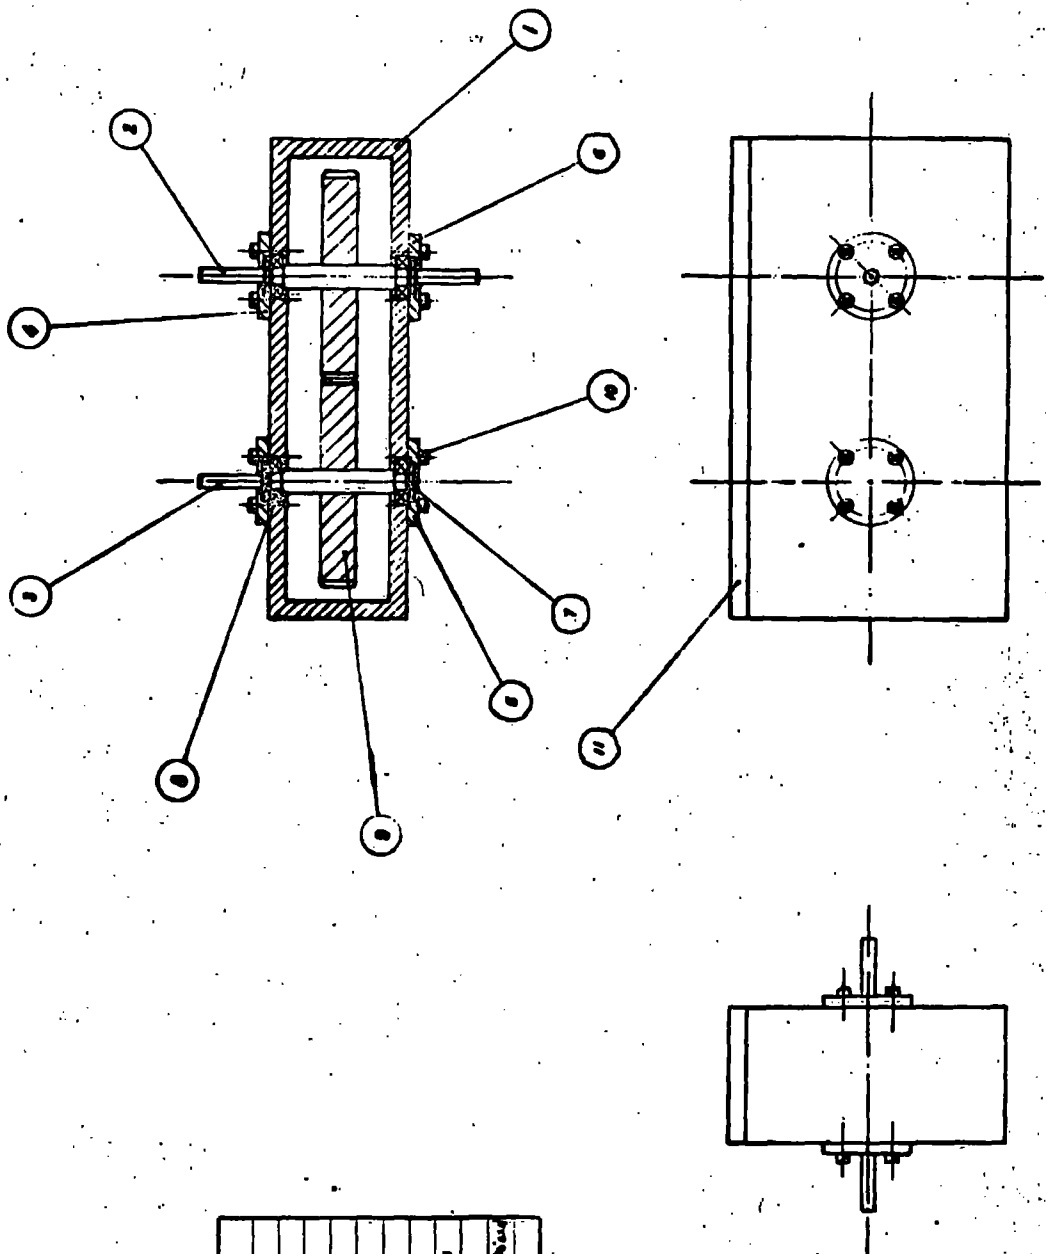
12. CONTRA-ROTATING GEAR-BOX.
